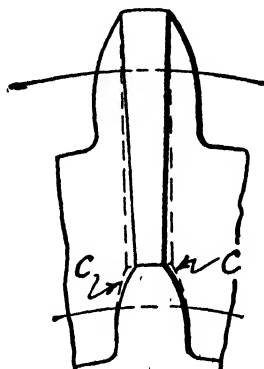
Correcting a Bevel Gear Tooth Shape.
